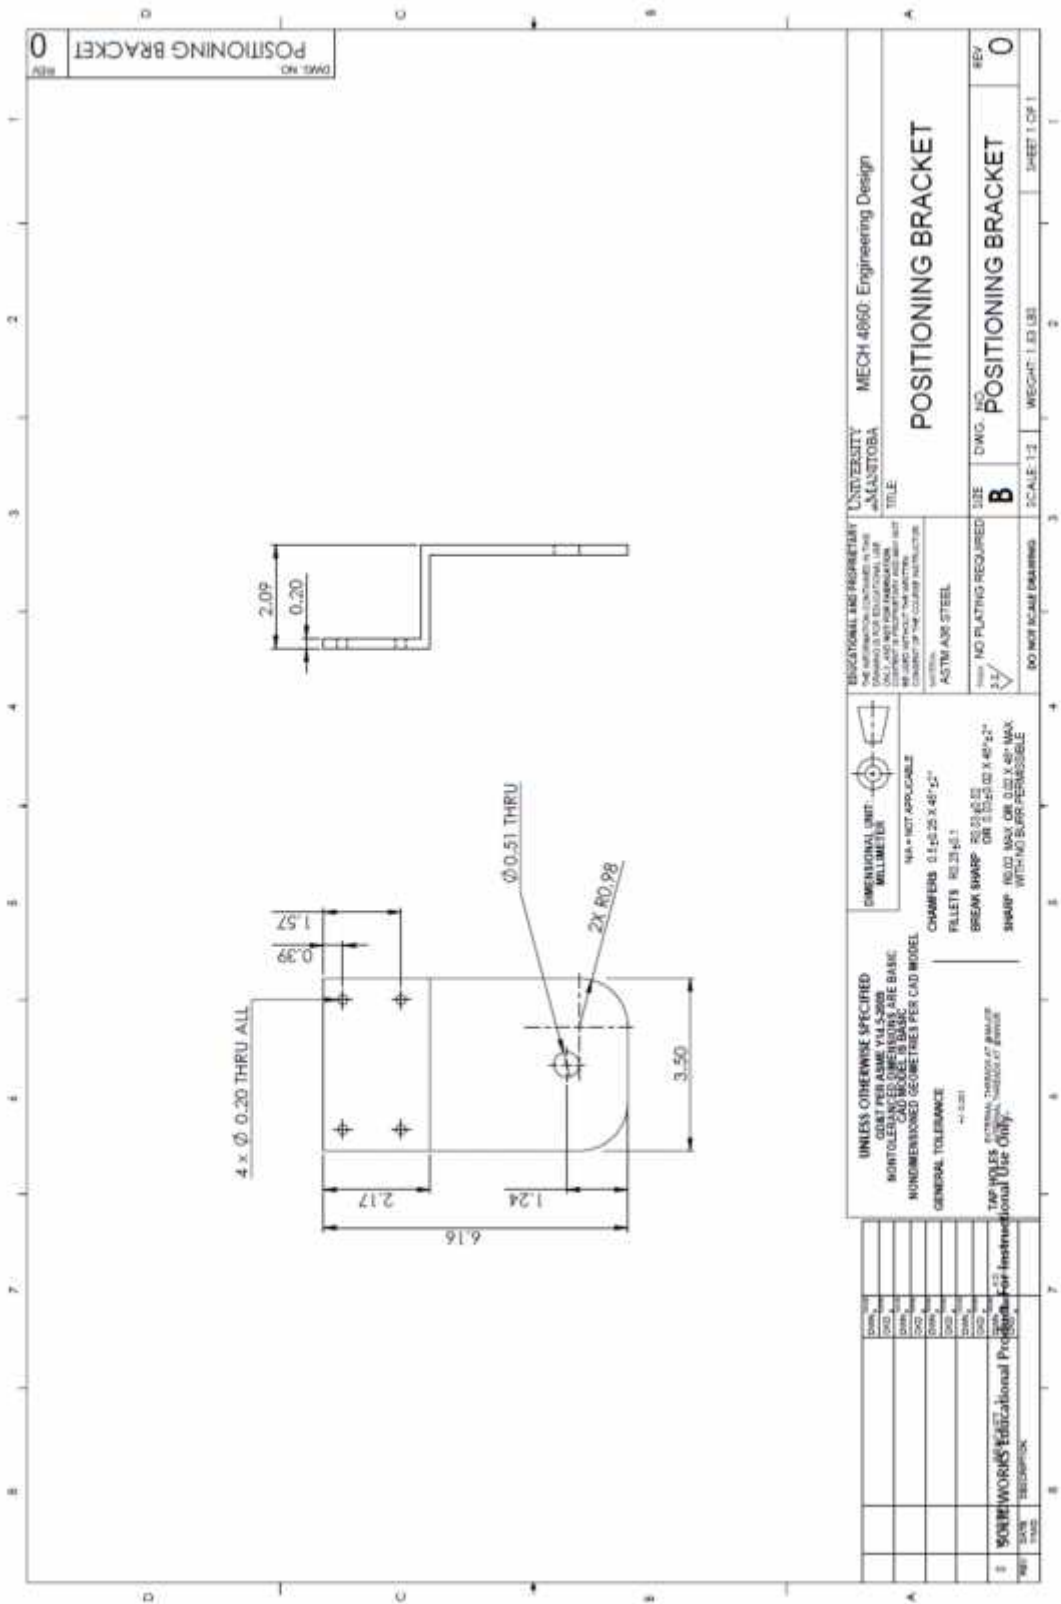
Technical drawing for the positioning bracket [11] used with permission.
